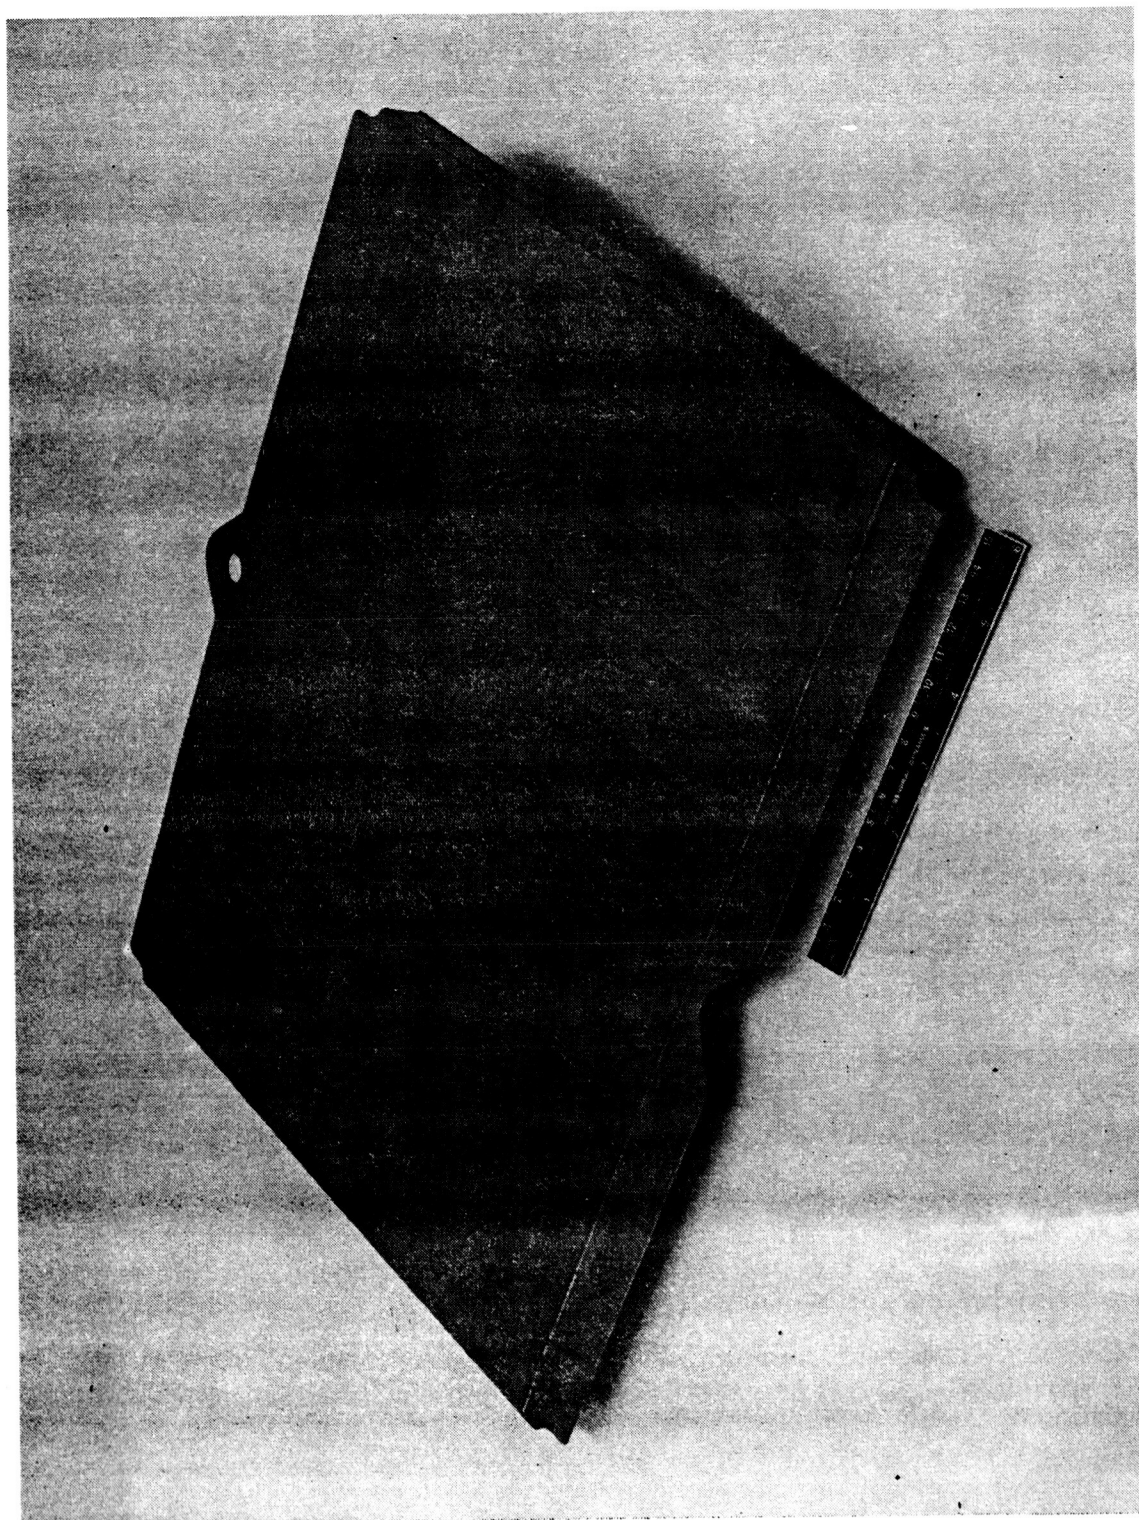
Tee-Stiffened Cb-752 Heat Shield Panel — Skin Side Ready for Coating (Photo No. 128327B)
